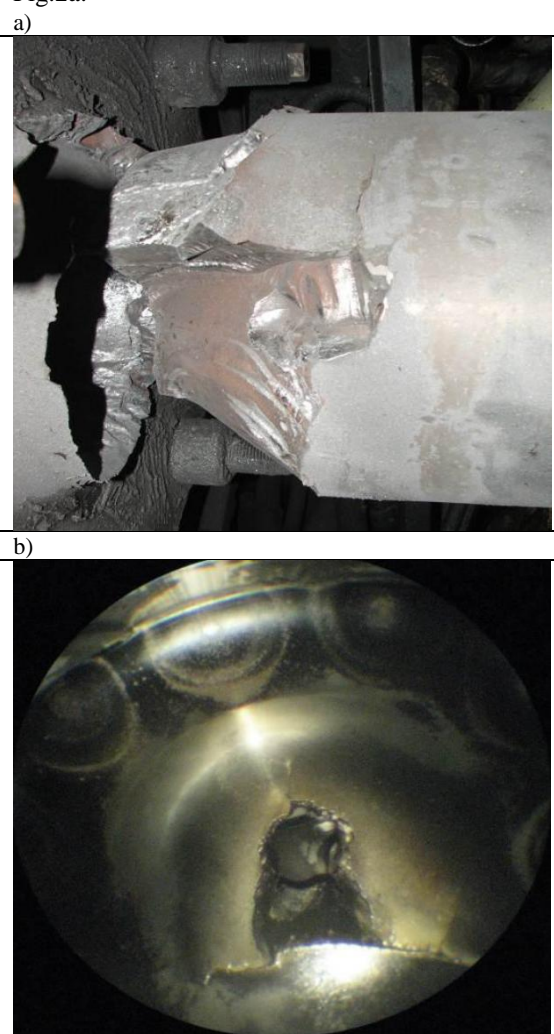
Damages of the drivetrain and marine piston engine elements: a) broken output shaft, b) damaged piston crown [2]
